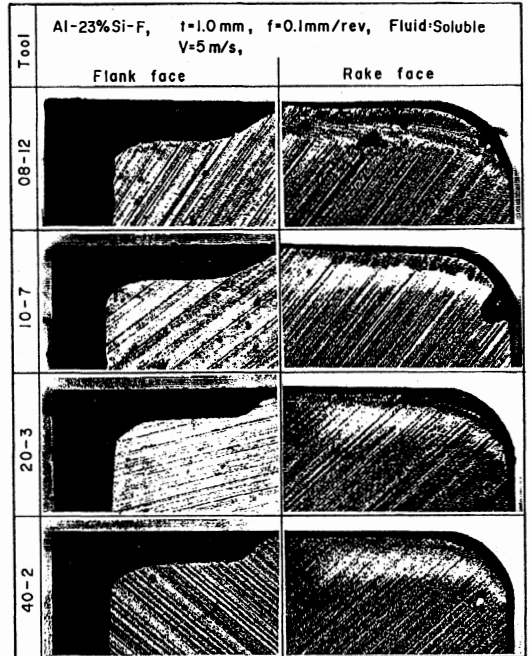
Aspects of flank and rake wear in machining Al-23%Si-F alloy. (cutting speed: $V=5\text{m/s}$, fluid: soluble type)
